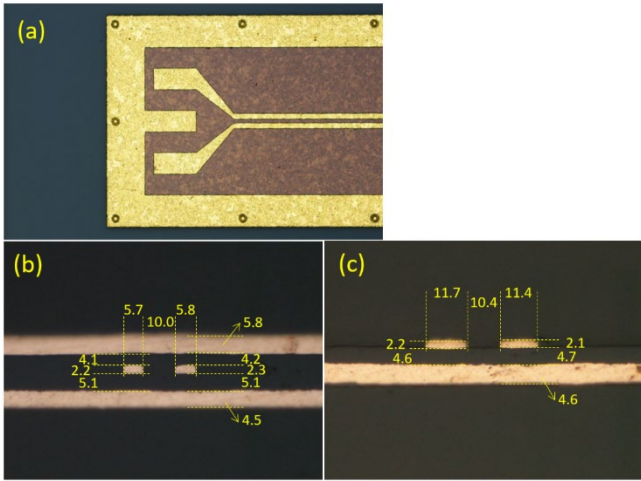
OM images of the PRIS: (a) Top view; (b) cross-sectional view of the stripline and its dimensions (μm); (c) cross-sectional view of the microstrip and its dimensions (μm).
